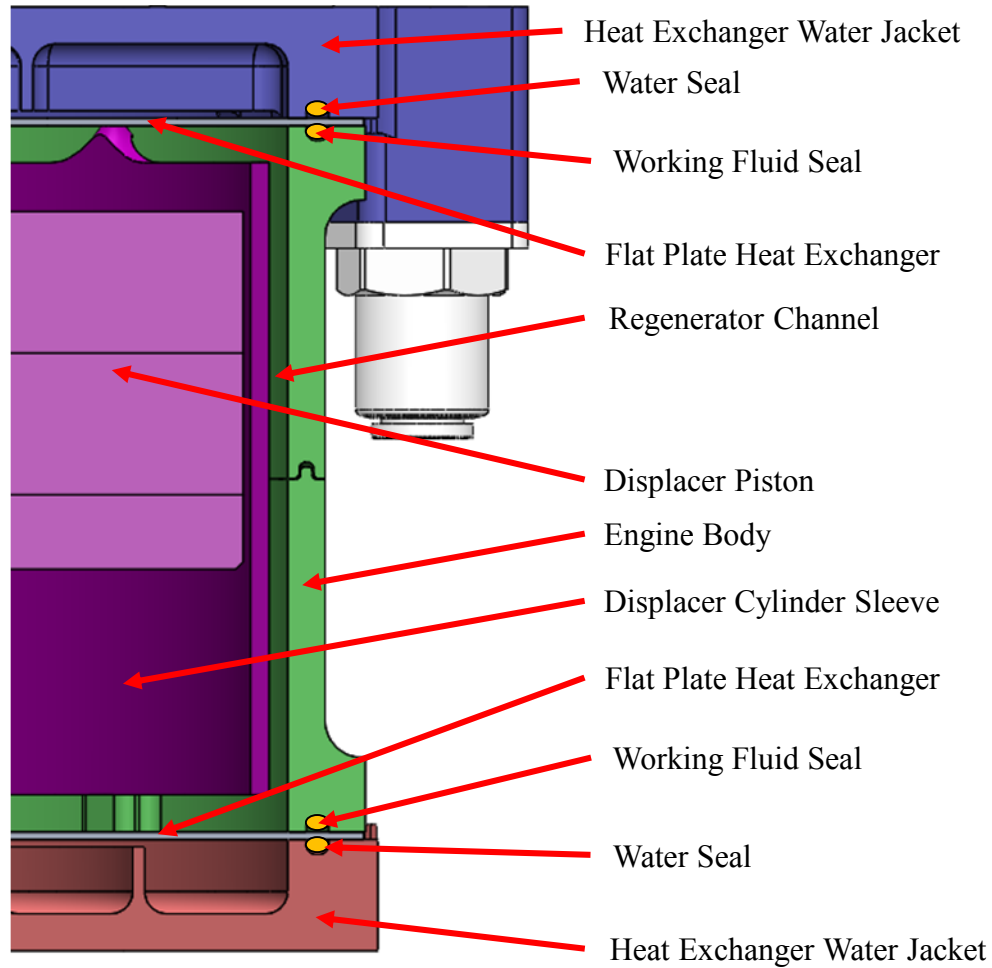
A section view of a solid model of the Mark 1 showcasing the regenerator channel, and the displacer piston and heat exchanger components.
